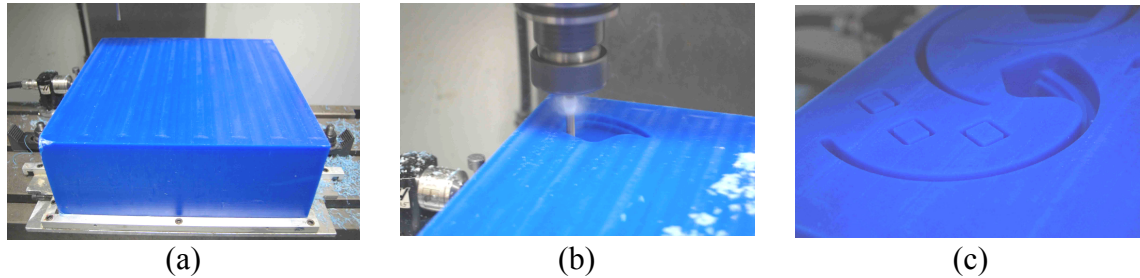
Machining Step 1 pictures: Wax block (a), Machining the cavity (b), Wax mold (c).
